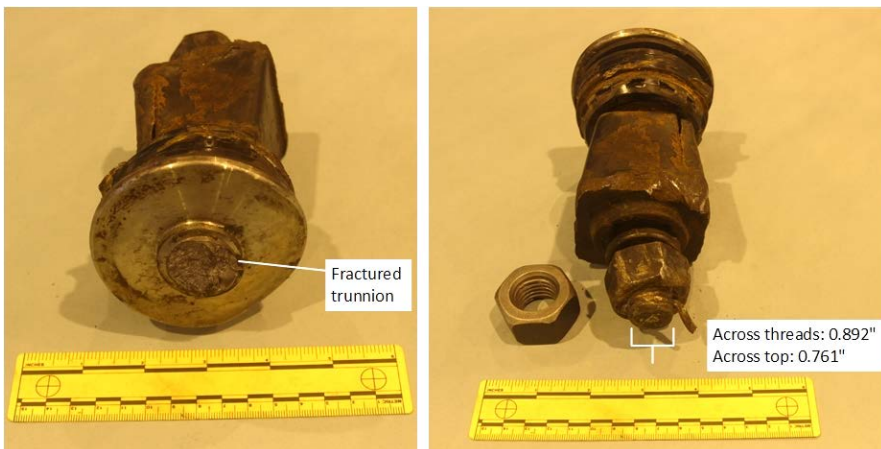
FURX 160030 fractured brake wheel trunnion rear view (left). Front view (right) with trunnion measurement notations, and exemplar brake wheel nut.
